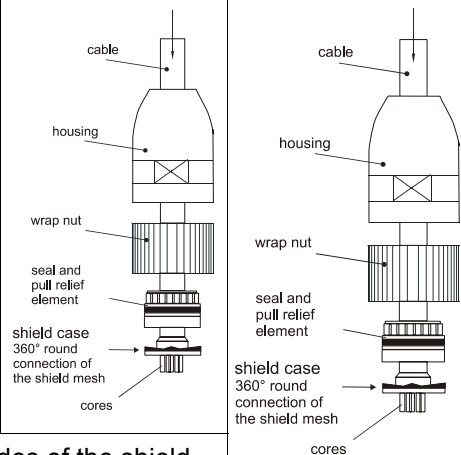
View on the SC series mating connector of the motor (internal thread M23)
